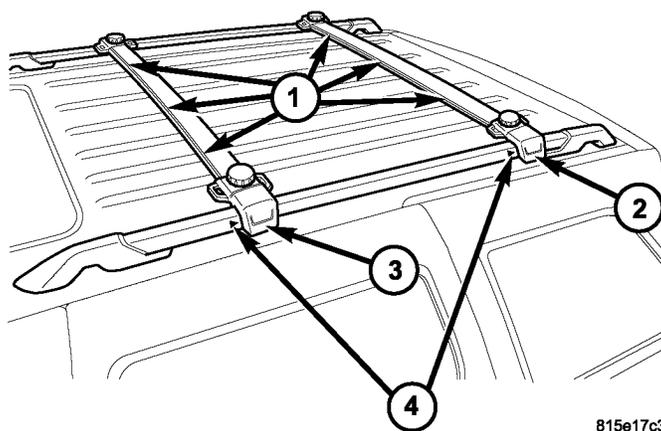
ROOF RACK CROSS BOW POSITIONING
